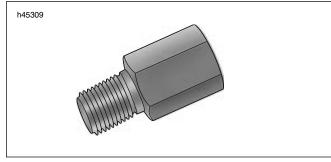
Oil Pressure Gauge Adapter (HD-45309)
